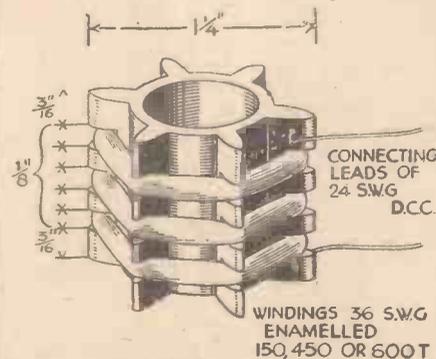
Details of the formers and windings. Two complete formers are required, these being arranged as shown in Fig. 1.
